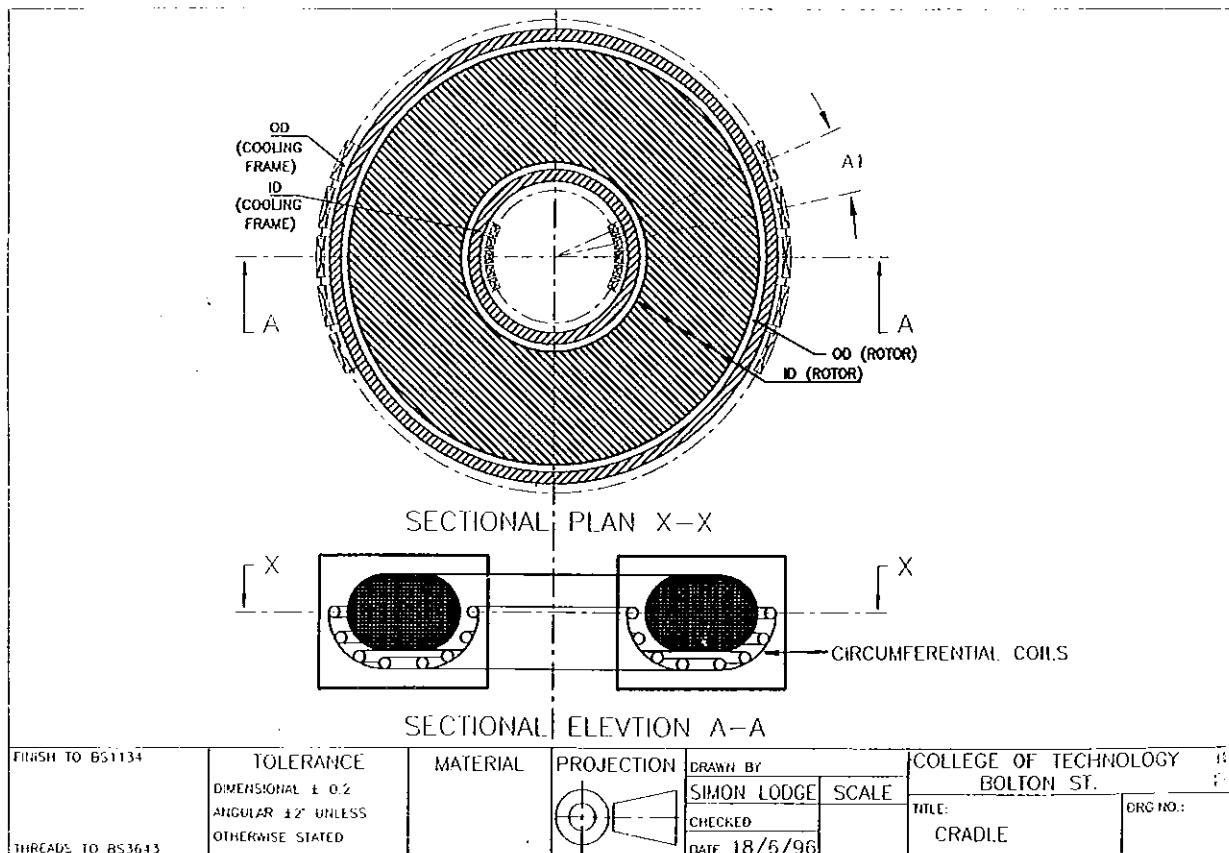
The aluminium ring flywheel with a single-phase induction-machine winding
